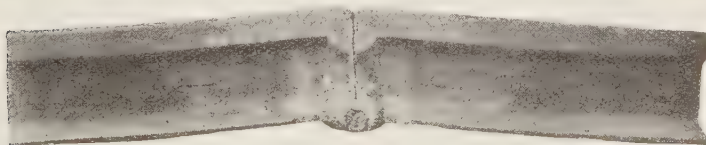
IV. — Fusion-thermit weld on worn 46-kgr. (92.7 lb.) rails of the French Est type, not annealed after welding.
